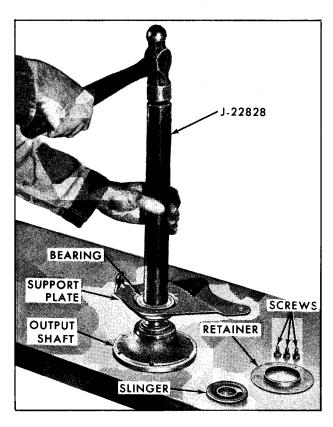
Installing Right Outer Shaft Support And Bearing
